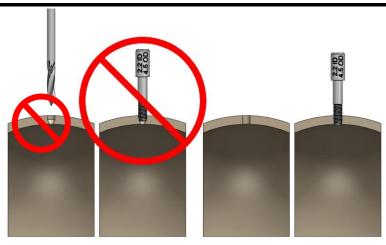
Incomplete Drilling with a Pointed Drill Bit (left); Complete Drilling (right)
